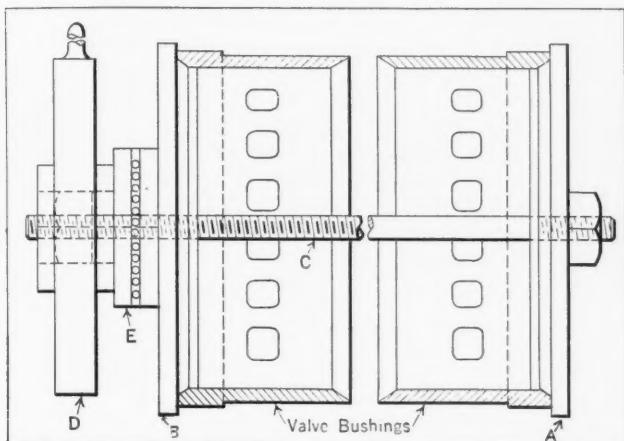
Equipment Used in Set-up Shown in Fig. 1
